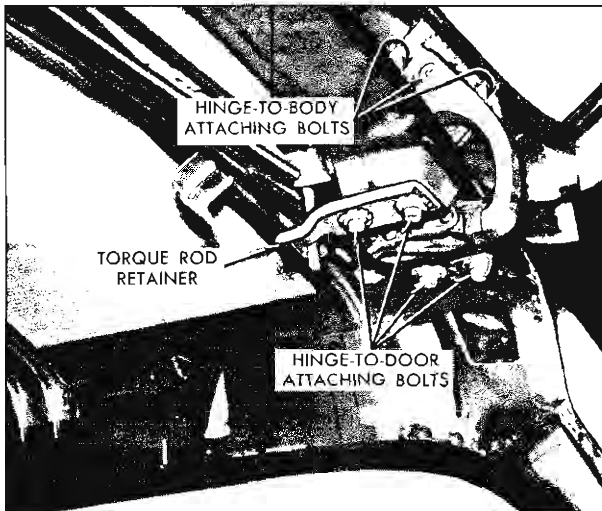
Back Door Hinge and Torque Rod Retainer
